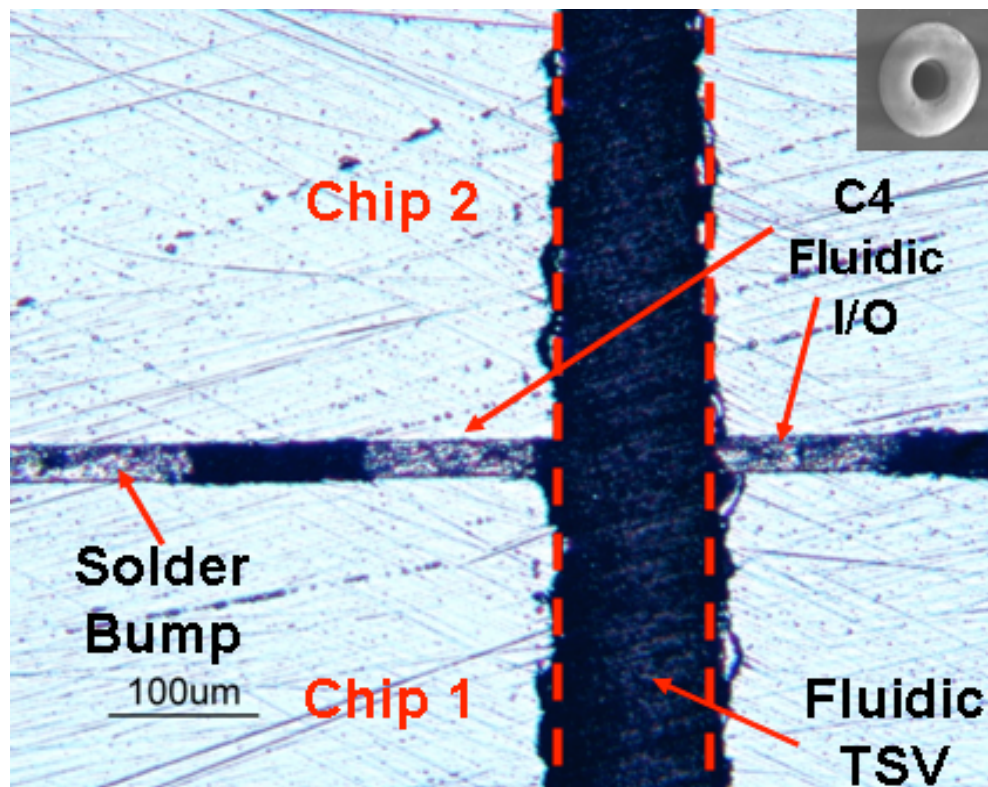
Cross-sectional optical image of a 3D chip stack assembled using C4 fluidic and electrical I/Os.
